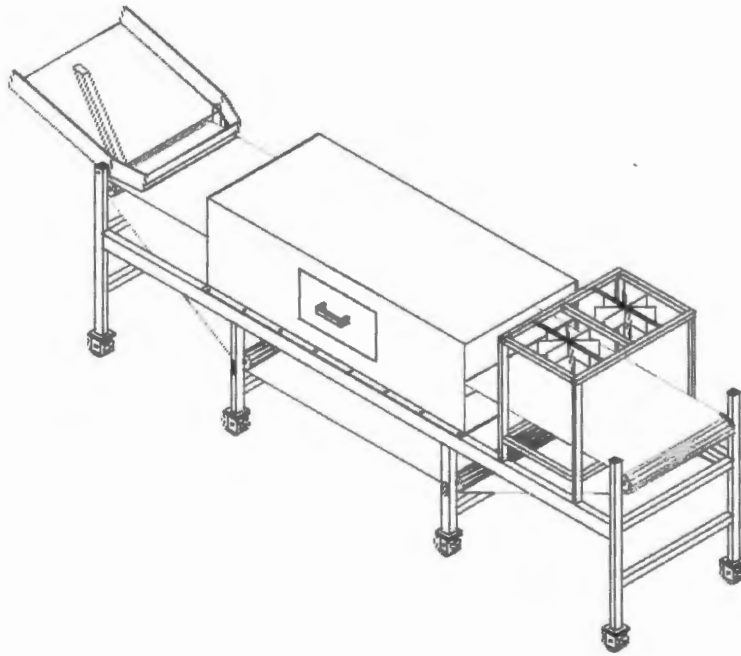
AUTOCAD Drawing of the Conveyor System (Southeast Isometric View)
